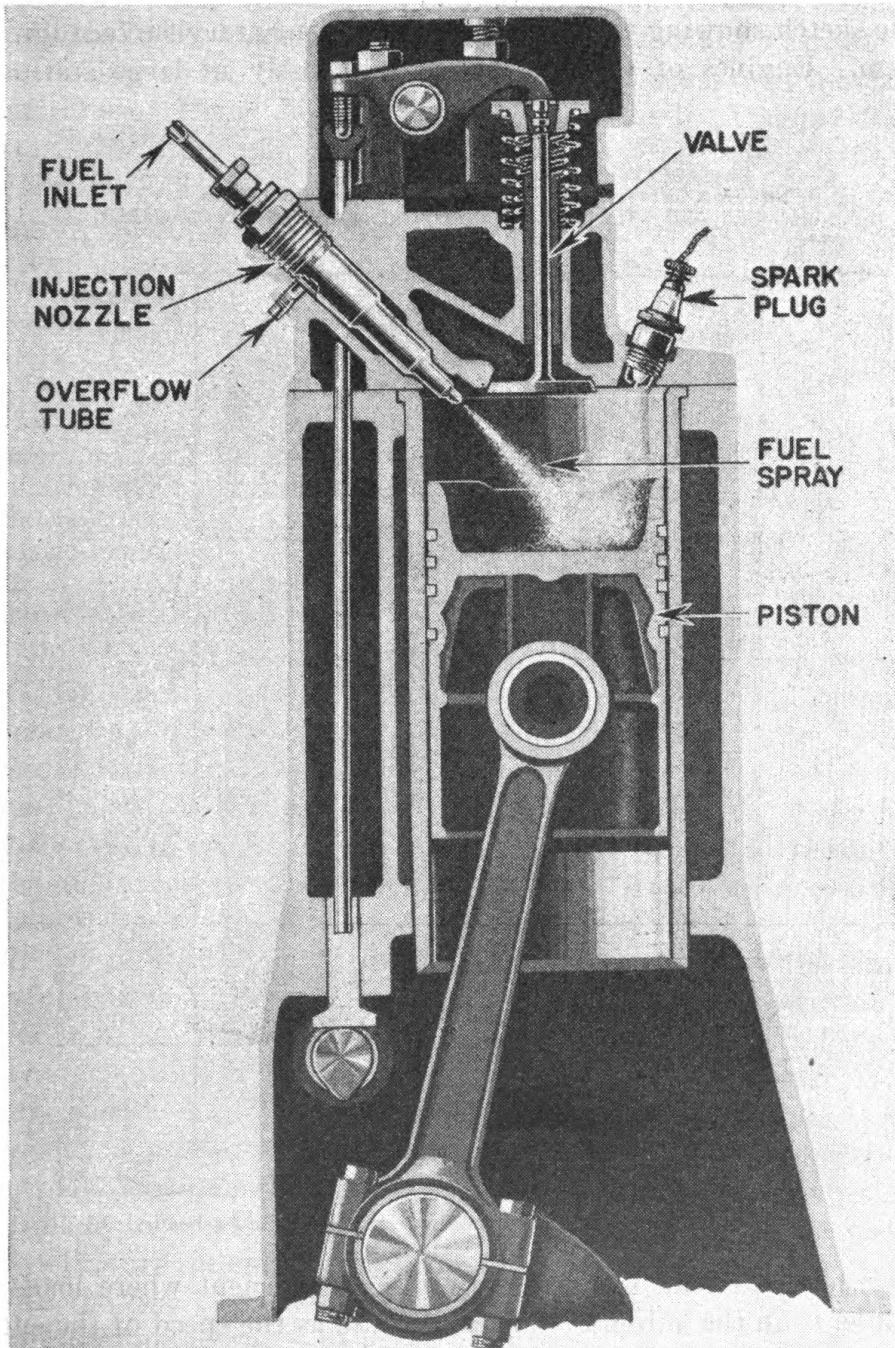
Cross section view of Hesselman type engine showing fuel injection nozzle and spark plug.
